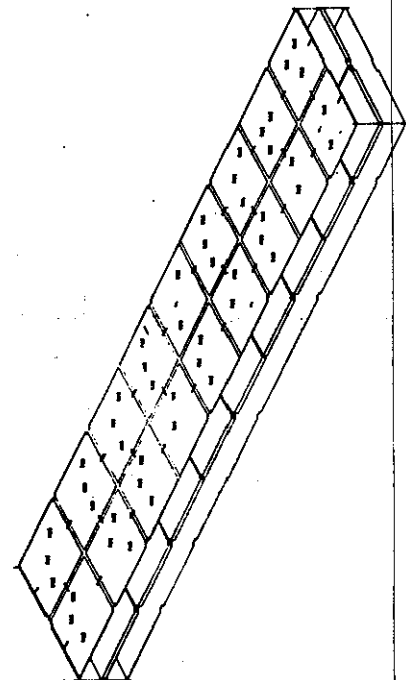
Exploded view of one end of a tile absorber layer, showing spacers, as well as the notches for cable connections and keyways for attaching the layer to the endplates
